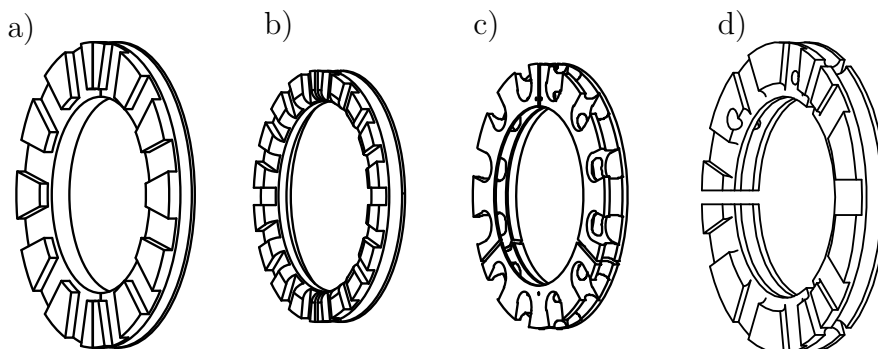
Oil wiper designs: a) oil wiper with bigger outer diameter to block splashing oil, b) oil wiper with smaller outer diameter to increase scraping performance, c) and d) profiled oil wiper ring with two scraping edges each.
